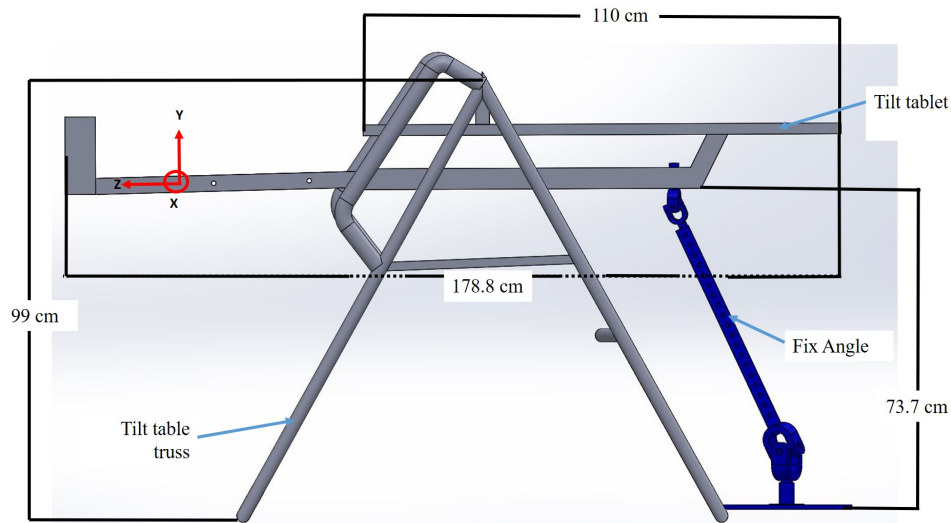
Side view of the SOLIDWORKS CAD model of the tilt table and the fix angle device set to 0° , with relevant dimensions
